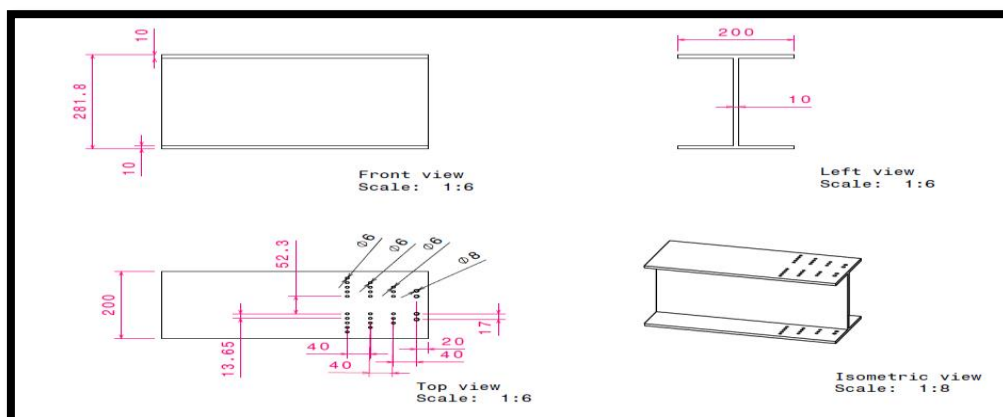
Design draft of 10 mm Thickness I -Spar beam
